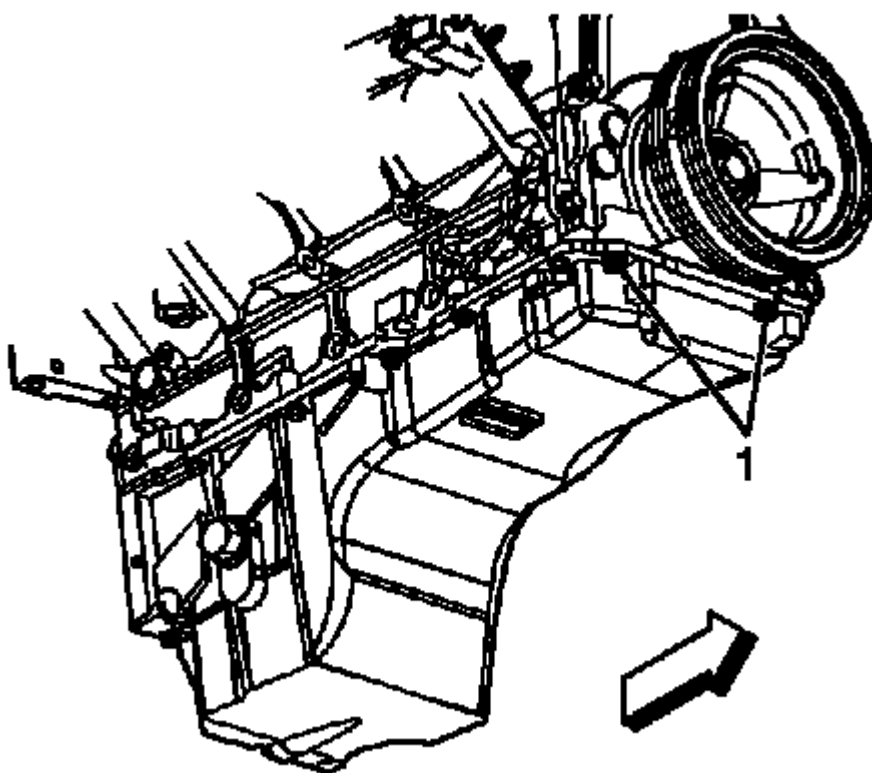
View Of Oil Pan-To-Front Cover Bolts
